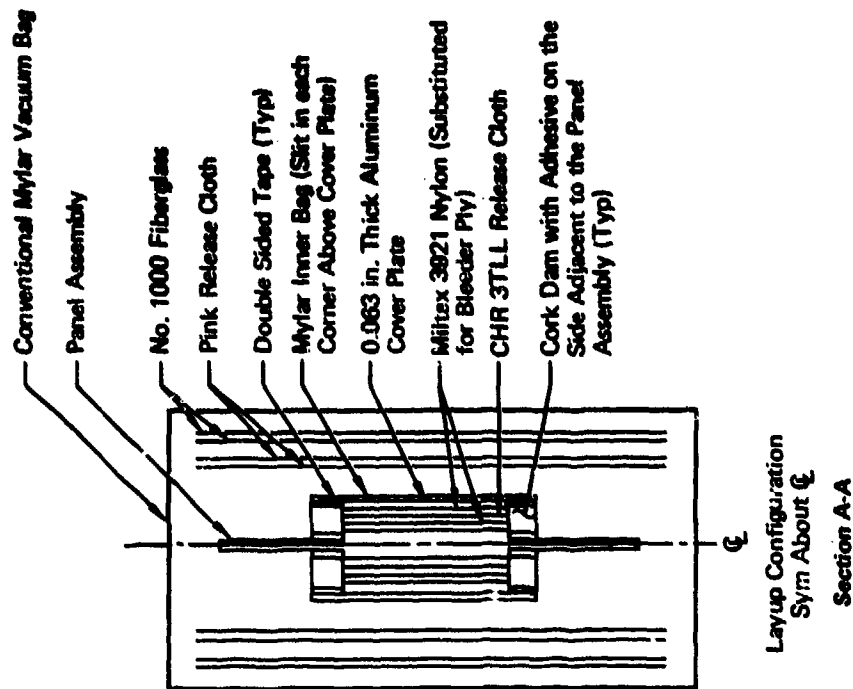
SIMPLE JOINT PANEL ASSEMBLY AND SPECIMEN MACHINING REQUIREMENTS
